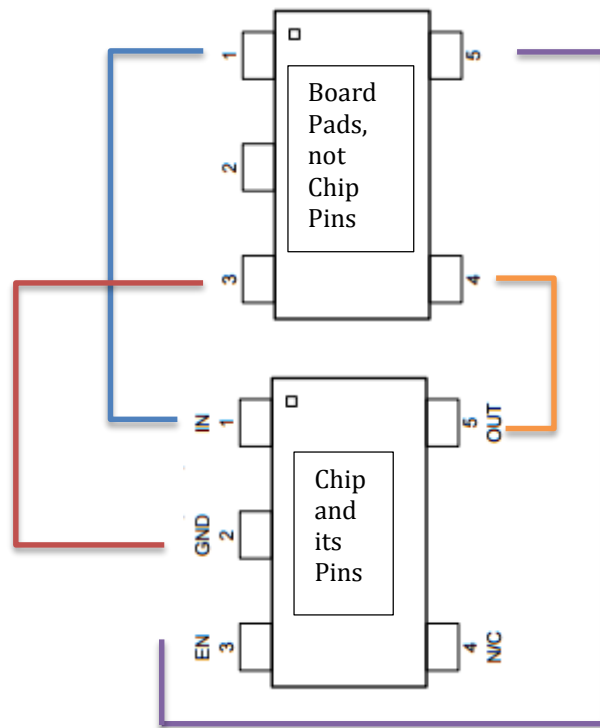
Corrected Pin/Pad placement. Top Picture is the pads. Bottom picture is the actual chip. Have to deadbug the chip so that the correct pins meet the correct pads.
